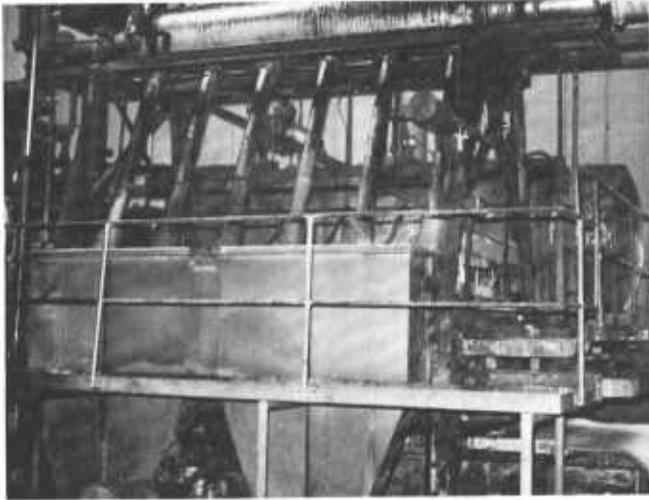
Chapman forming machine showing swing spouts and stock return boxes.
